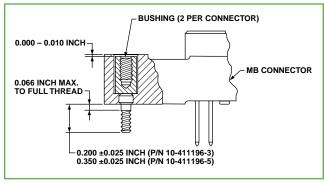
ASSEMBLY OF LOCKING/MOUNTING BUSHING INTO MB CONNECTOR
